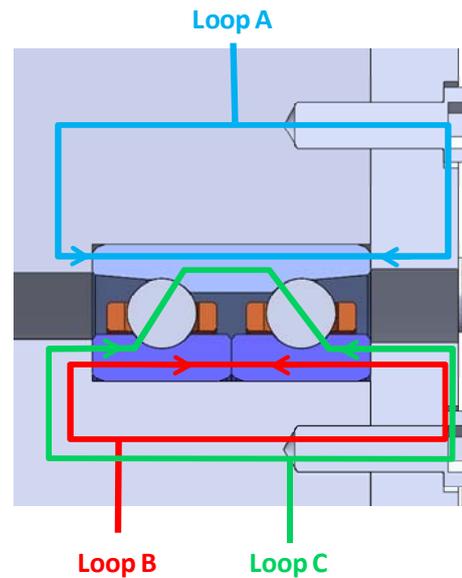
Preload and bearing clamping loops in back-to-back hard-preload configuration
